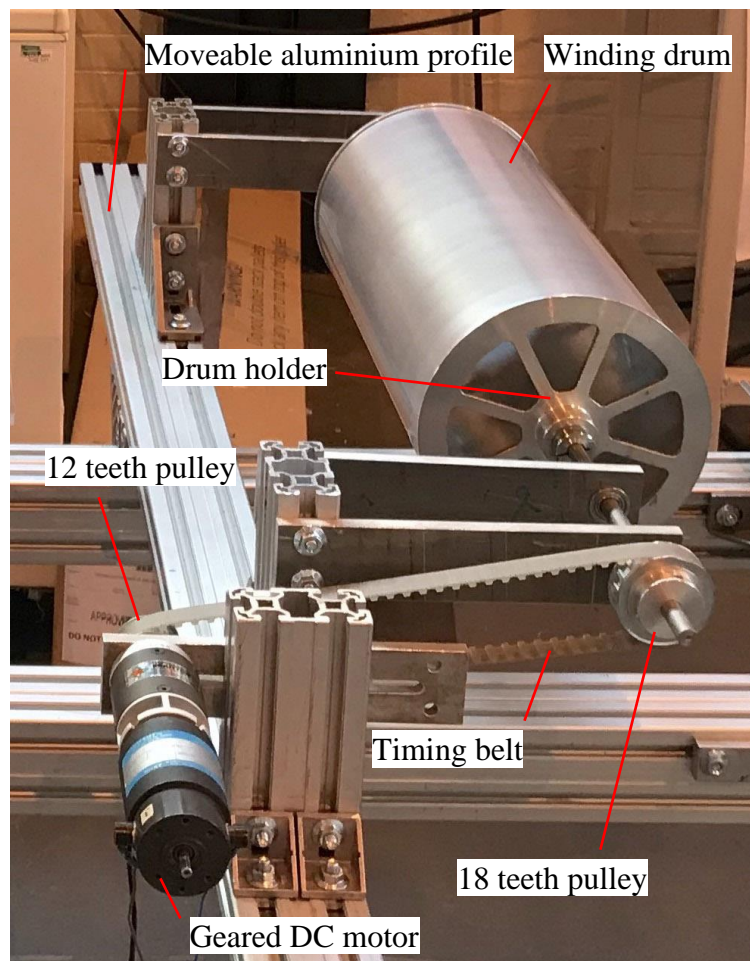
The winding drum rotating via the belt and pulley assembly.
